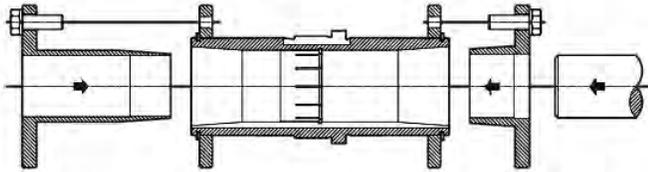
Short Shaft Bushing and Output Hub Assembly
